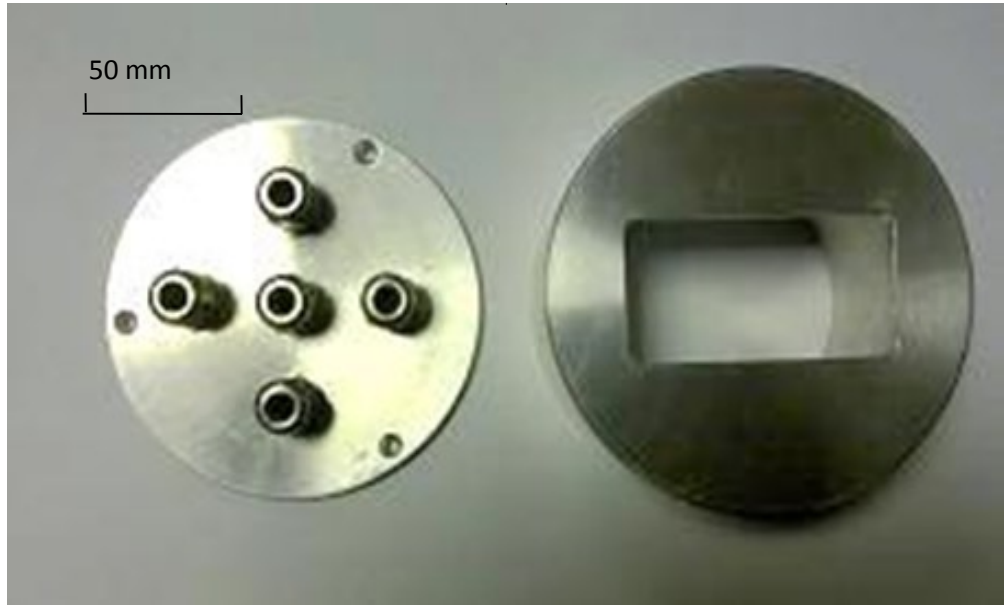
Manufactured transducer housing: left hand side is the lid containing 5 waterproof glands; right hand side is the main body of the casing, with an aperture cut out for the array to be located
